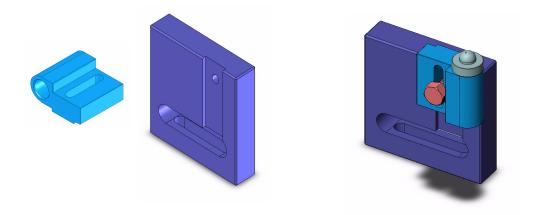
Locator holder and vertical support and the assembled view for the test fixture
